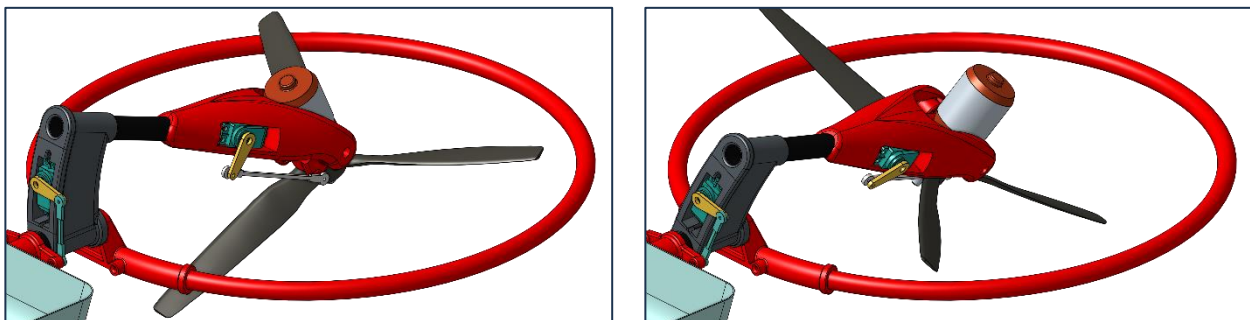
Left:* Rear propeller tilted longitudinally. *Right:* Rear propeller tilted laterally.
